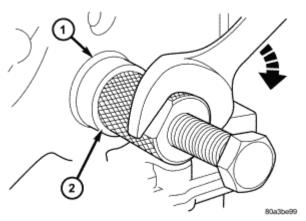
Special Tool 6341A Courtesy of CHRYSLER LLC
